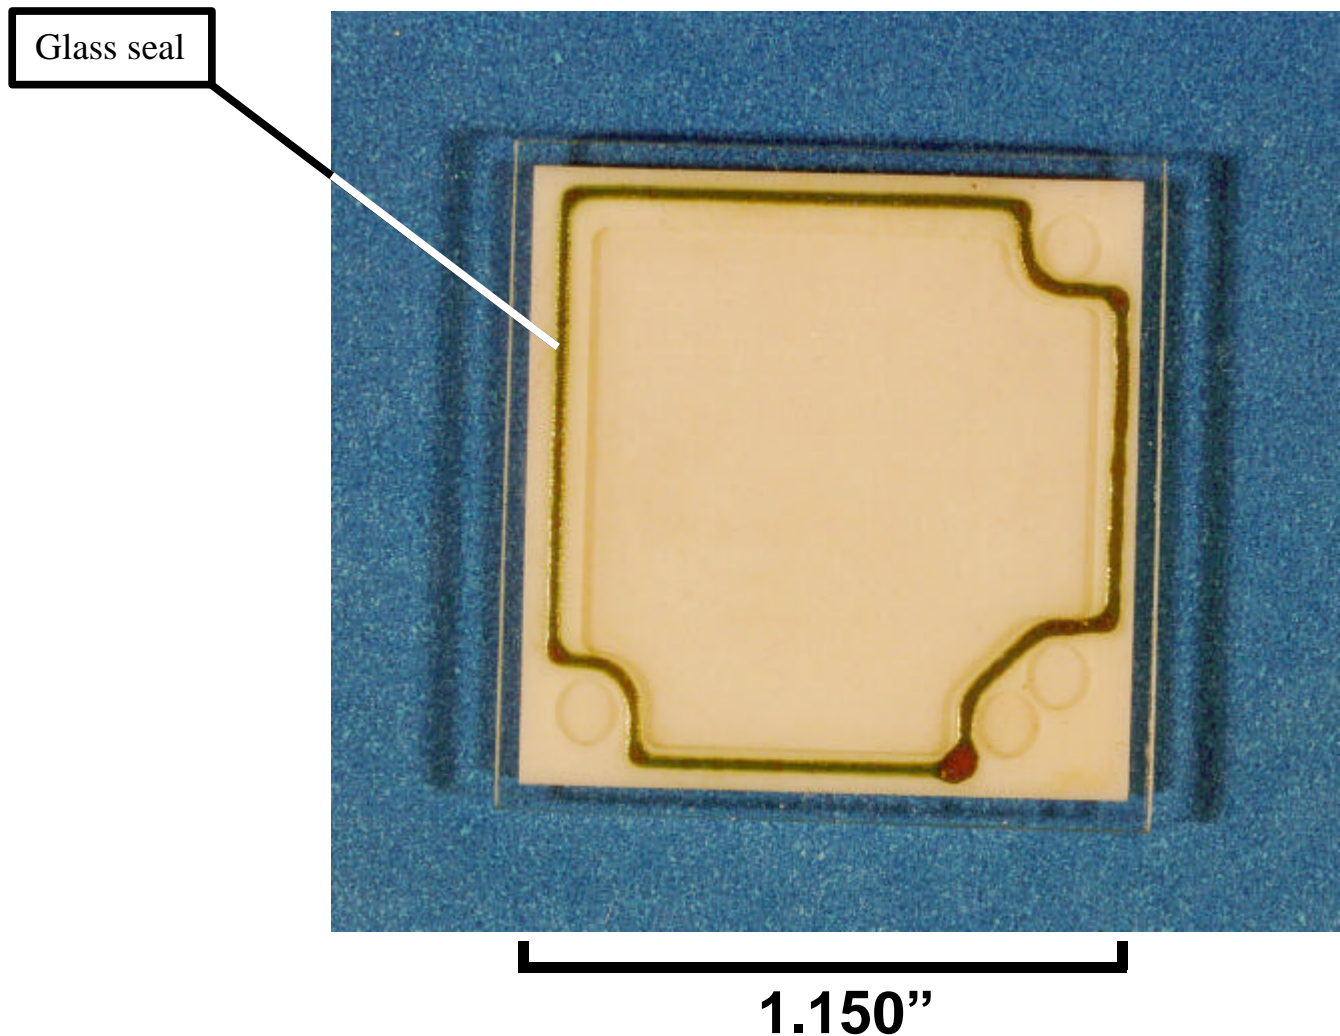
Macor sheet, machined to the shape of the submodule, and sealed to a sheet of glass.
